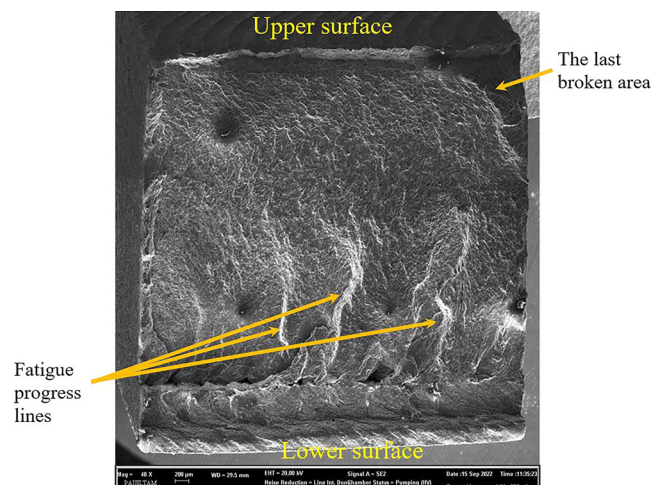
Welded fractured surface as a result of fatigue test.¹ [Colour figure can be viewed at [wileyonlinelibrary.com](https://onlinelibrary.wiley.com)]
